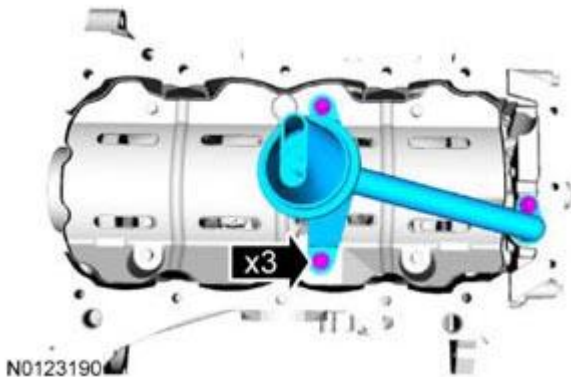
Locating Oil Pump Screen And Pickup Tube Bolts
